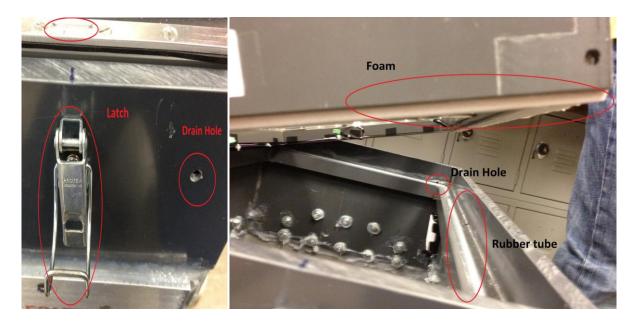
Latch, rubber tube, drain hole and extra foam under the lid to enable the container to be water proof.
